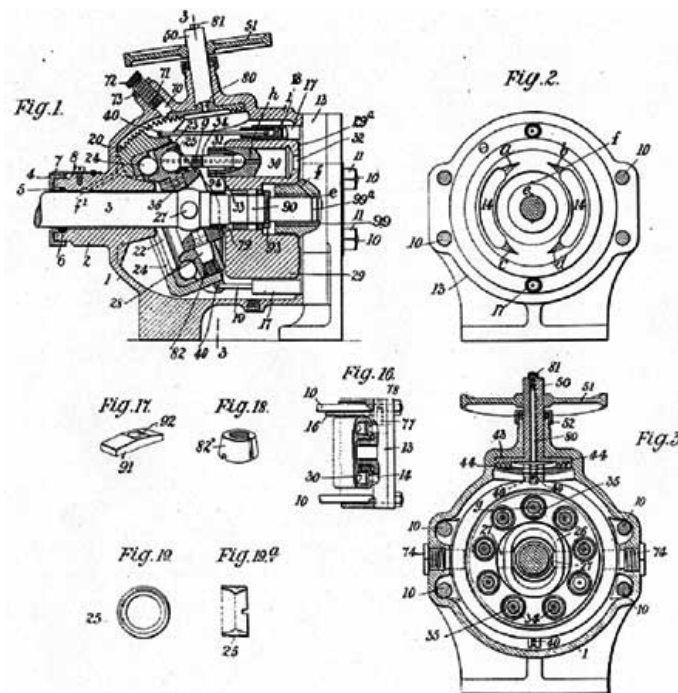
Williams & Janney's Axial Piston Pump and Motor. ca. 1907 [2]
